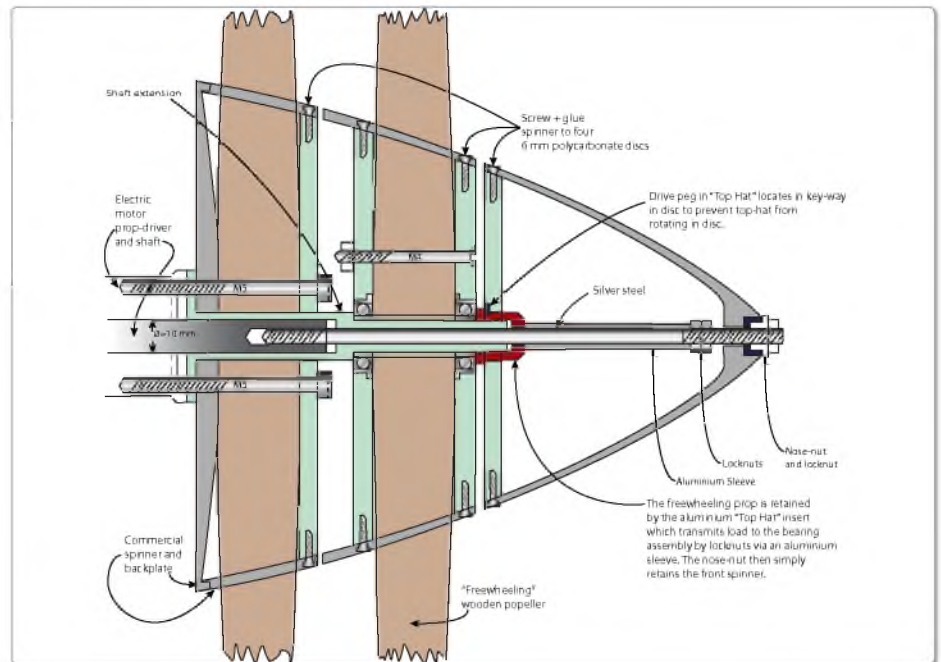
Final (Mk.6) assembly drawing for the Gannet CR prop design. The shorter commercial spinner proved much easier to balance accurately than the long home-made Wyvern spinner
